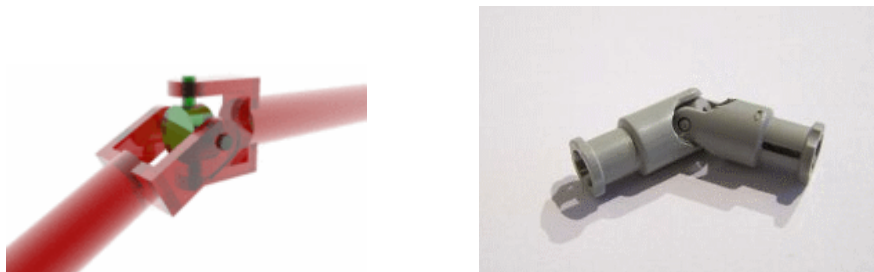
Cardan – a universal joint, drawing and Lego swivel
